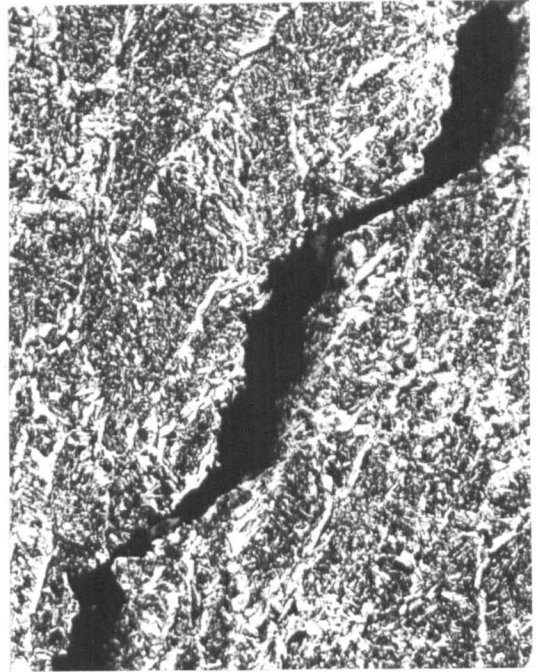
Chevron crack in a manual metal arc weld with electrodes C1. TP47.
